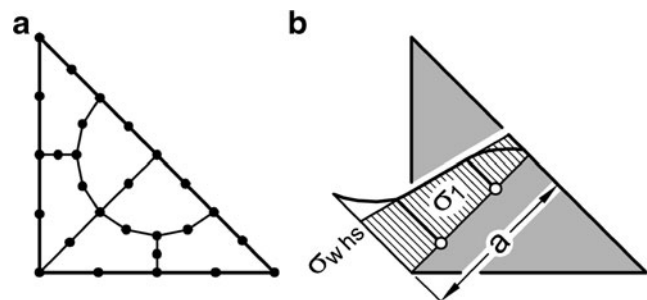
Fillet weld modelling by 20-node hexahedral elements and evaluation of the hot-spot weld stress by linear extrapolation (after [40])
